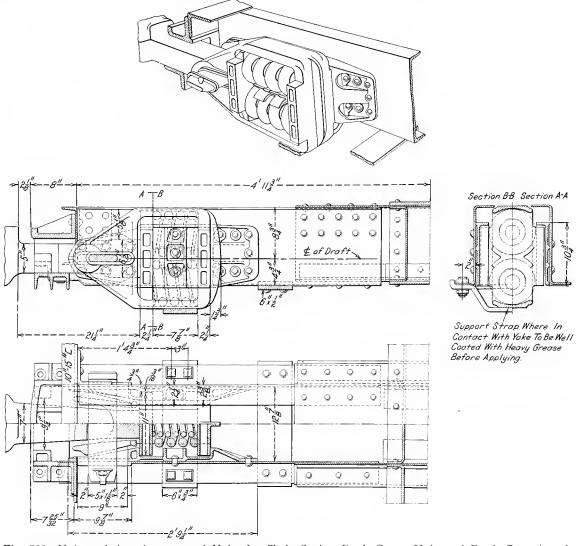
Universal Attachments and Yoke for Twin Spring Draft Gear. Universal Draft Gear Attach-
